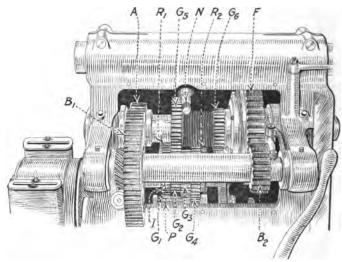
Brown & Sharpe milling machine spindle driving gears.
